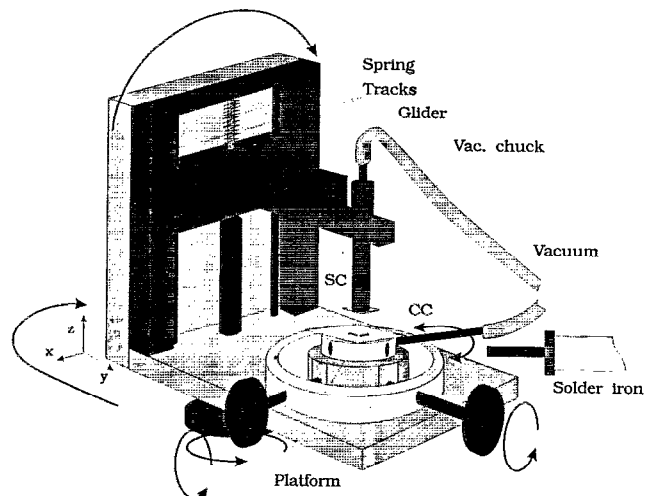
The flip-chip bonding machine consists of a platform that can be moved in the  $x$  and  $y$  directions and a chuck that moves in the  $z$  direction perpendicular to the platform. The carrier chip (CC) is mounted on the platform and the sampler chip (SC) is placed on the chuck. Both chips are held by a vacuum that is controlled by a gate valve with a lever. During bonding the whole setup can be rotated around two axes to allow inspection of the space between the two chips from different sides. Heating of the platform and the carrier chip for soldering is done by a soldering iron inserted into the platform. Bonding can be performed with an accuracy of better than  $10\text{ }\mu\text{m}$ .
